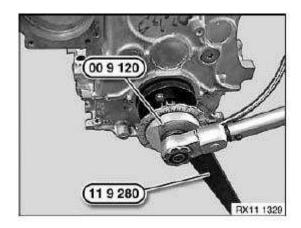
Special Tool (11 9 280) And (00 9 120) Courtesy of BMW OF NORTH AMERICA, INC.
